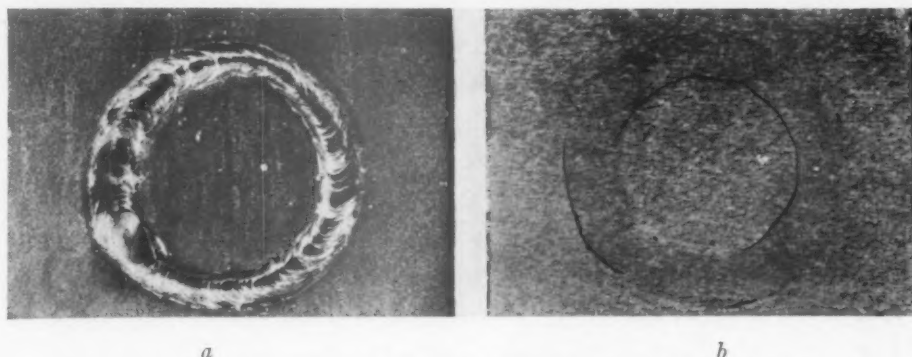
TYPICAL CIRCULAR BEAD-CRACK SENSITIVITY, WELD TEST SPECIMEN.
